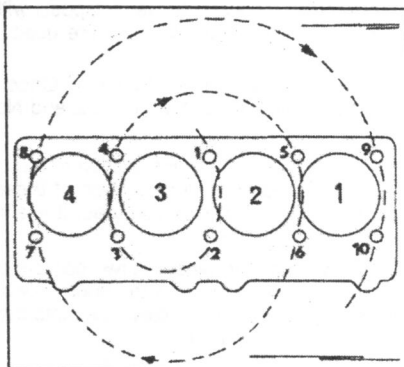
The tightening sequence for the cylinder head bolts. Valid for all engines.
